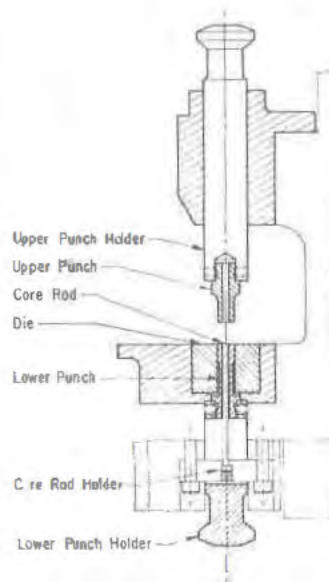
Core rod tooling for compressing troches or candy pieces with hole in center (courtesy, Vector/Colton).
